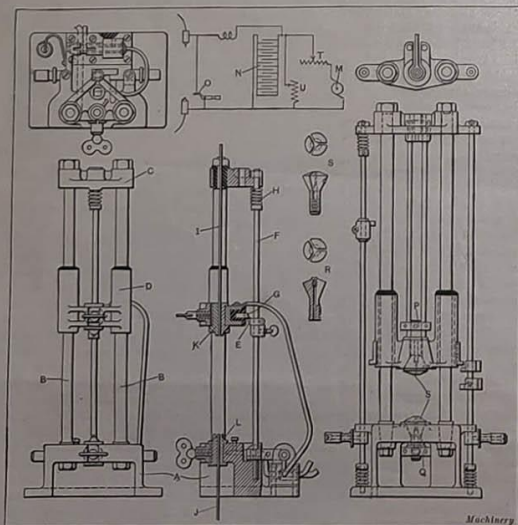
Plan, front and sectional elevation of portable percussive welding machine and connections. Two types of machines are shown.
